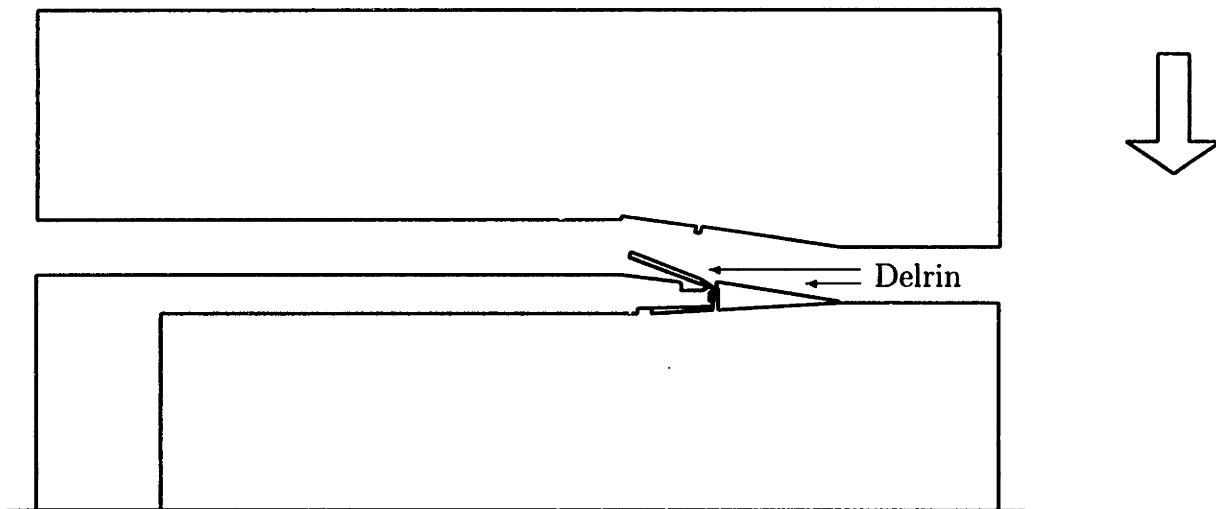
Final press: Top, bottom and side flexure mechanism dies.
